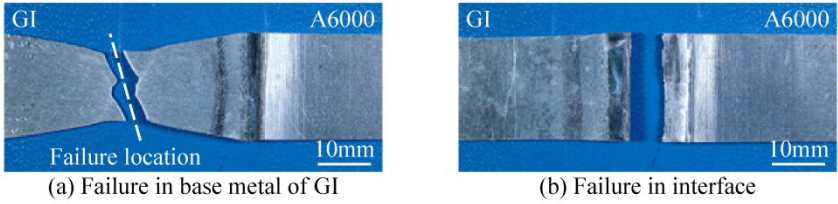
Tensile shear specimen after testing of GI/A6000 Laser Roll Welded joints
